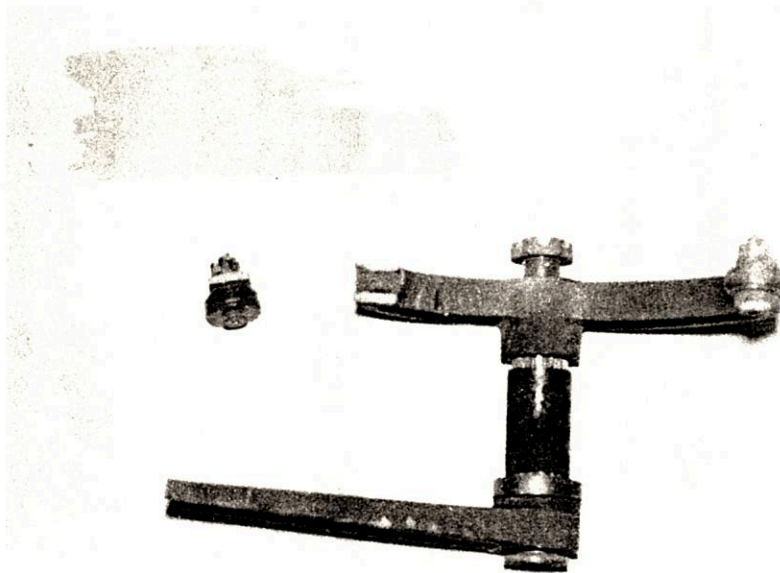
FAILED THRUST REVERSER BELL CRANK
